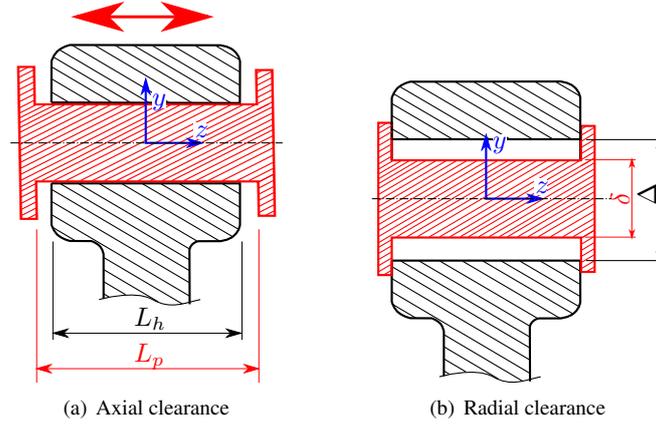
Clearances applied to the revolute joints. (a) Axial clearance which transforms the revolute in a cylindrical joints. (b) radial clearance which transforms the revolute in a spherical joints.
